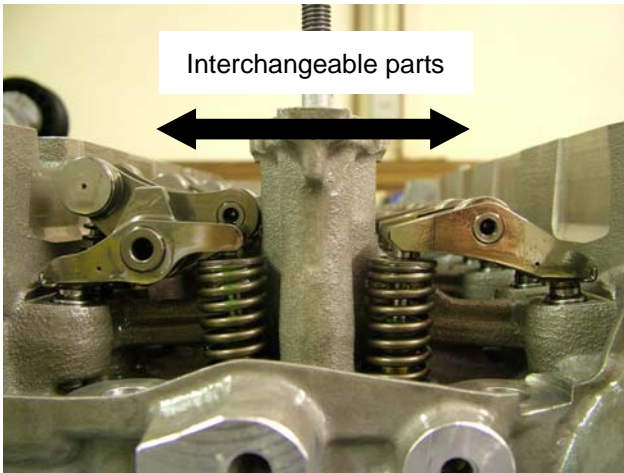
Cylinder head with standard finger follower on one side and VLD on the other.
